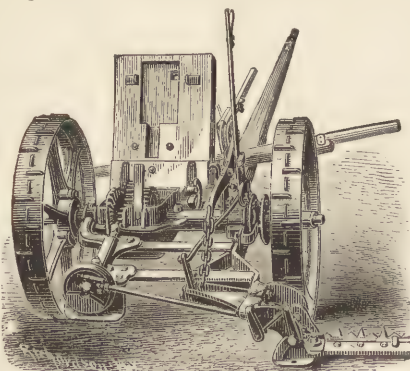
Osborne Mower with Box turned up to show Gearing.
